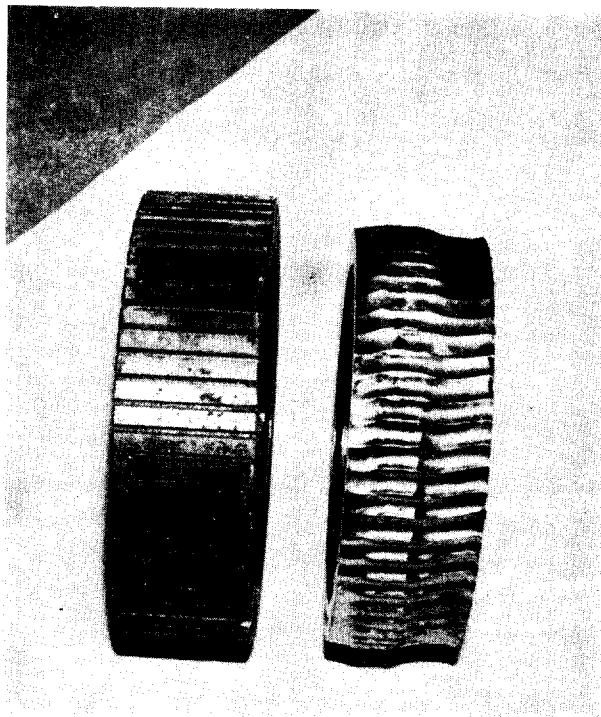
New and worn roller. Note the appearance of the worn roller, which indicates a surface hardening.
